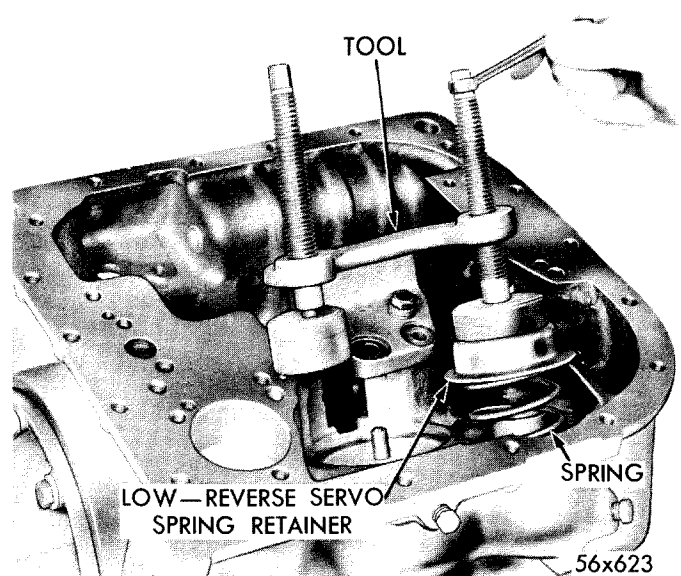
Compressing Low and Reverse Servo Piston Spring and Retainer
